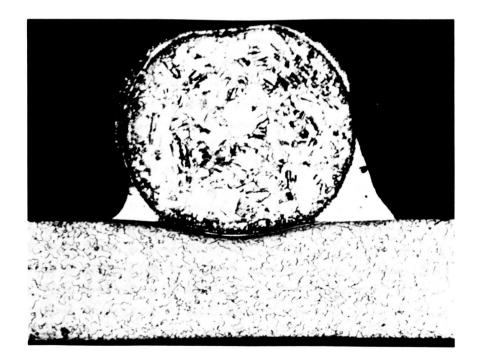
Weld joint 1.6. JPL 2; solder coated copper wire to Inco ribbon; sterilized; 150x magnification; nitric-acetic etch (02338).
